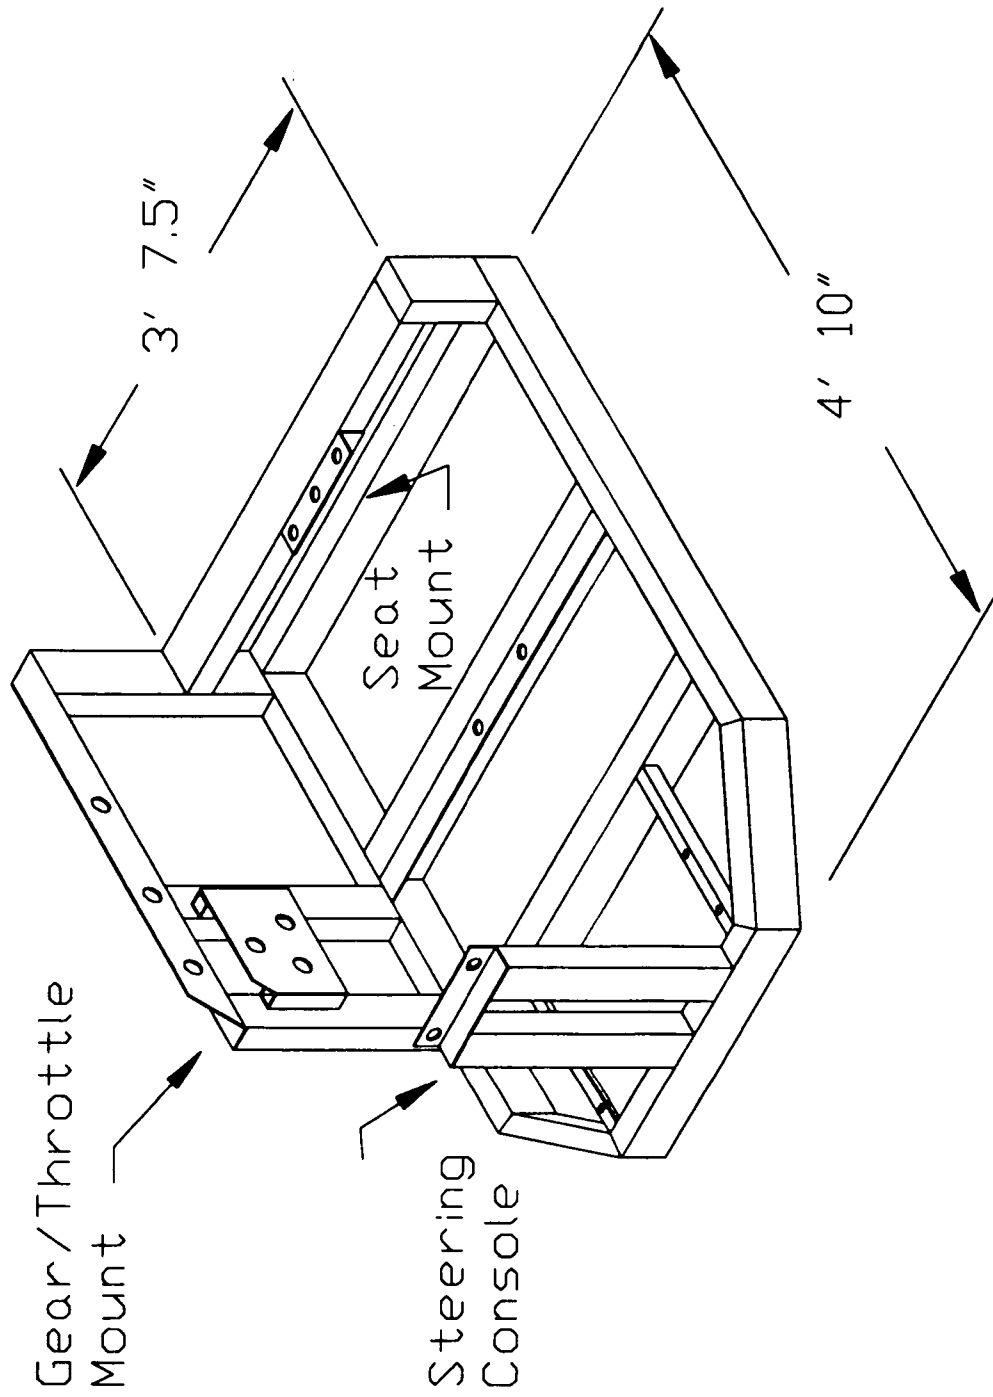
Operators station frame for mounting of steering console, seat, and throttle and gear selectors.
